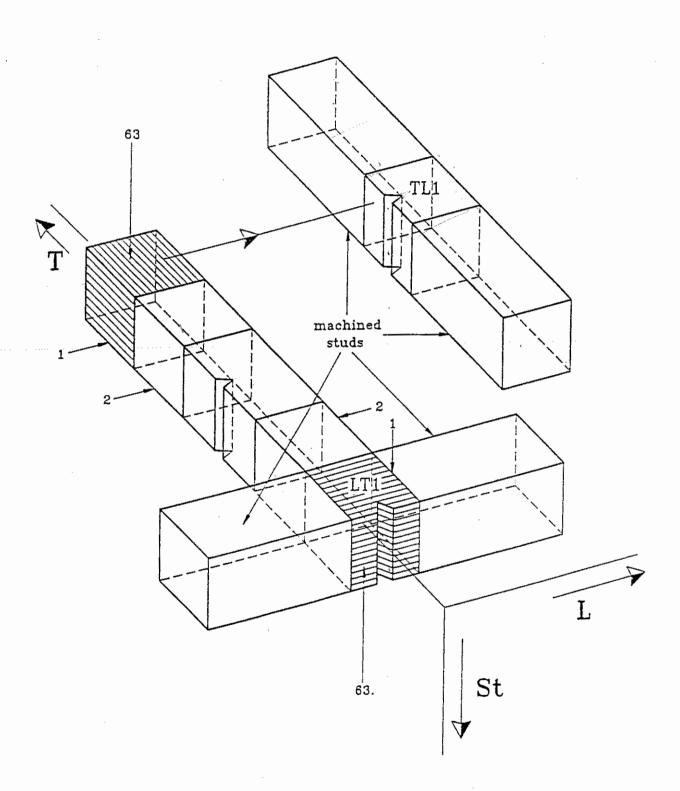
DEFORMATION CONSTRAINTS BY HARD WELDED ZONES
